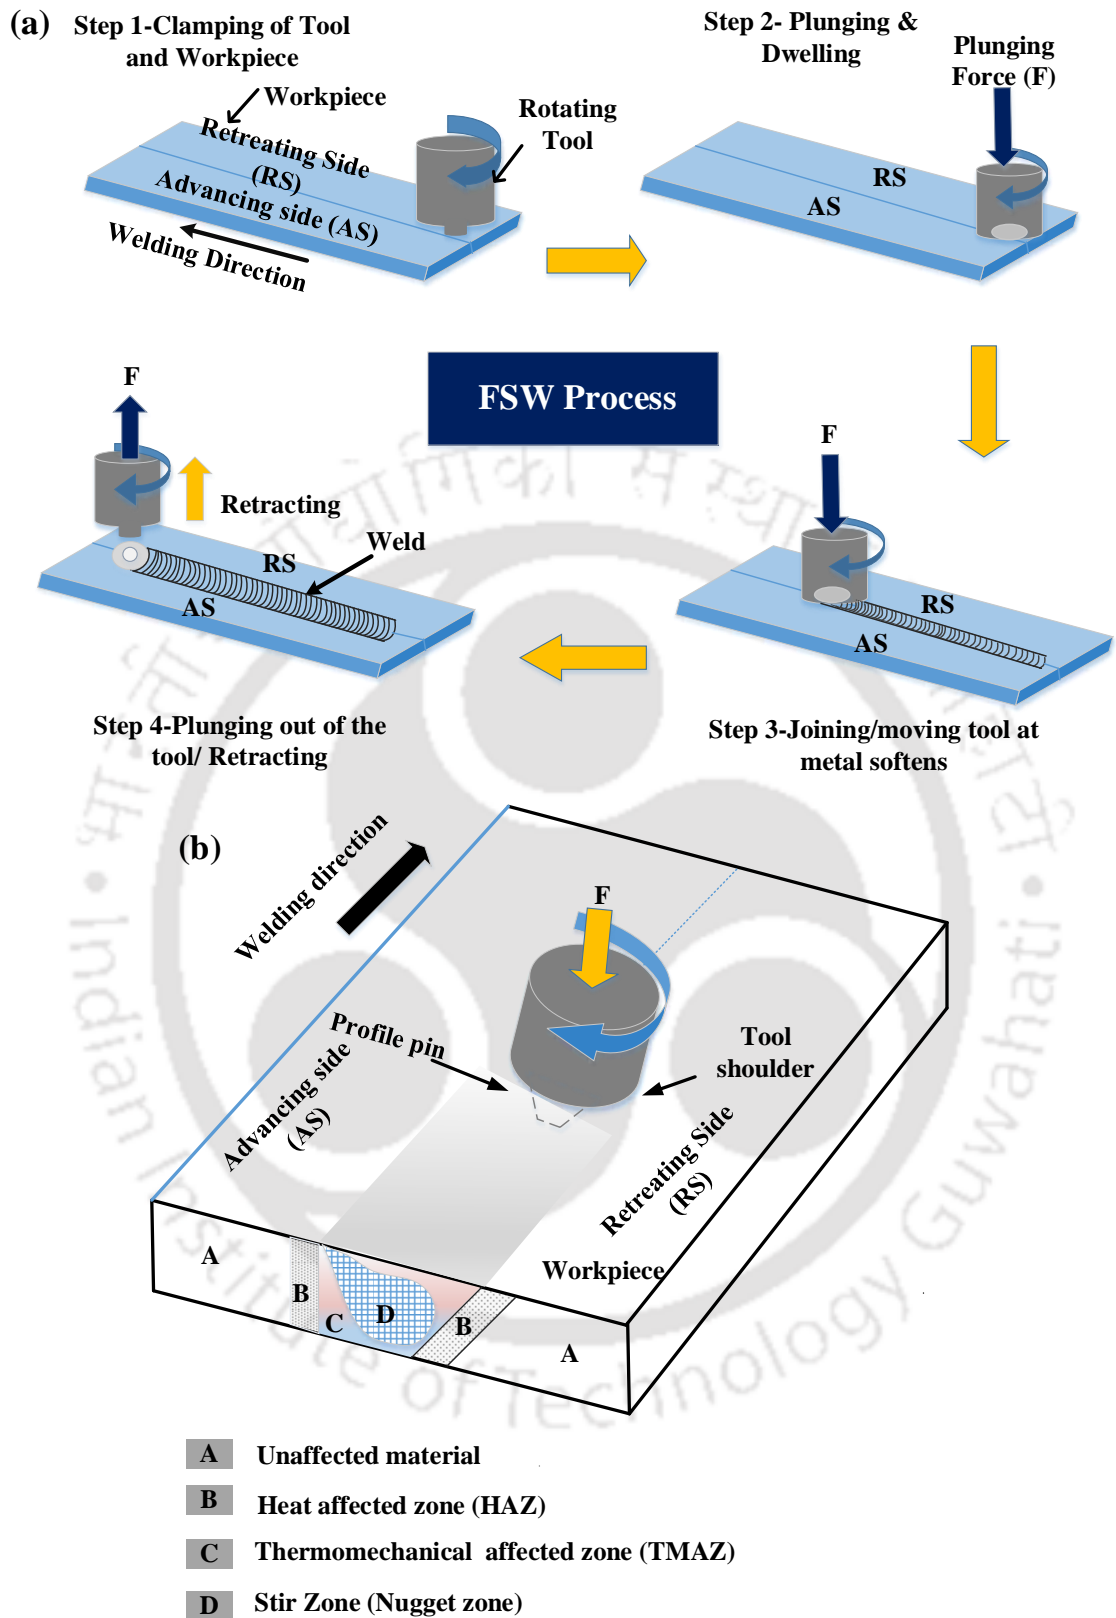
Different steps involved in (a) the FSW process and (b) generated different weld zone.
